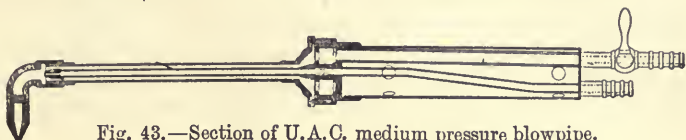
Section of U.A.C. medium pressure blowpipe.
